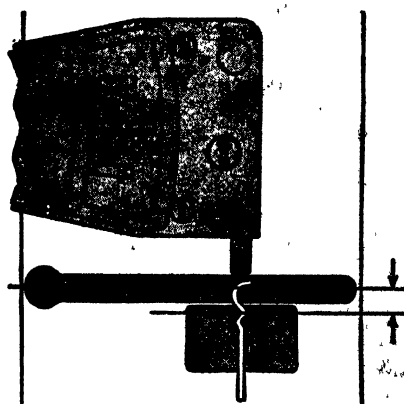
Checking Stamping from the Center of a Notch to a Crucial Point on the Inside Radius of a Formed Section
